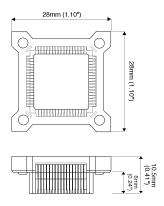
120 pin QFP Socket Adapter Dimensions for HP E3471B (HP P/N E3471-61620)
